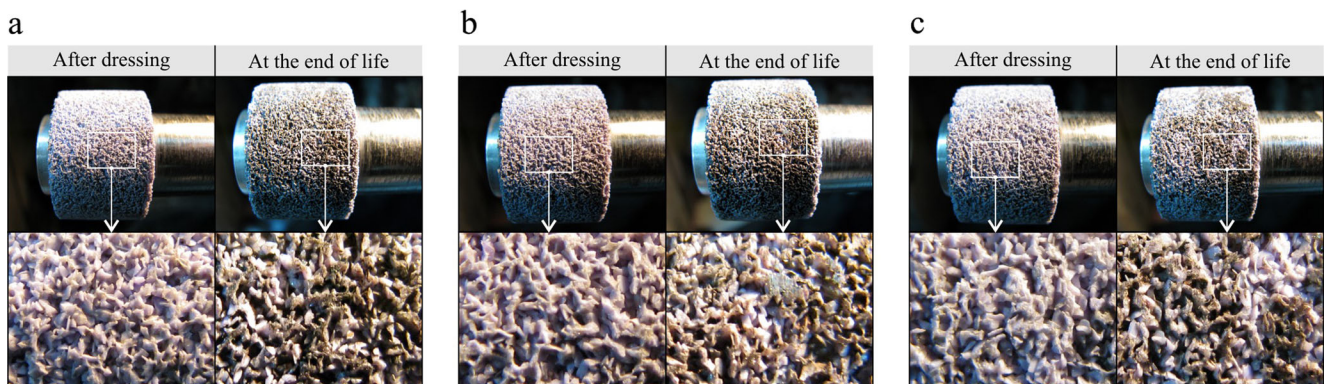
Macroscopic images of the active surface of the tested grinding wheels after dressing and at the end of life: a grinding wheel C1, b grinding wheel C2, and c grinding wheel C3
